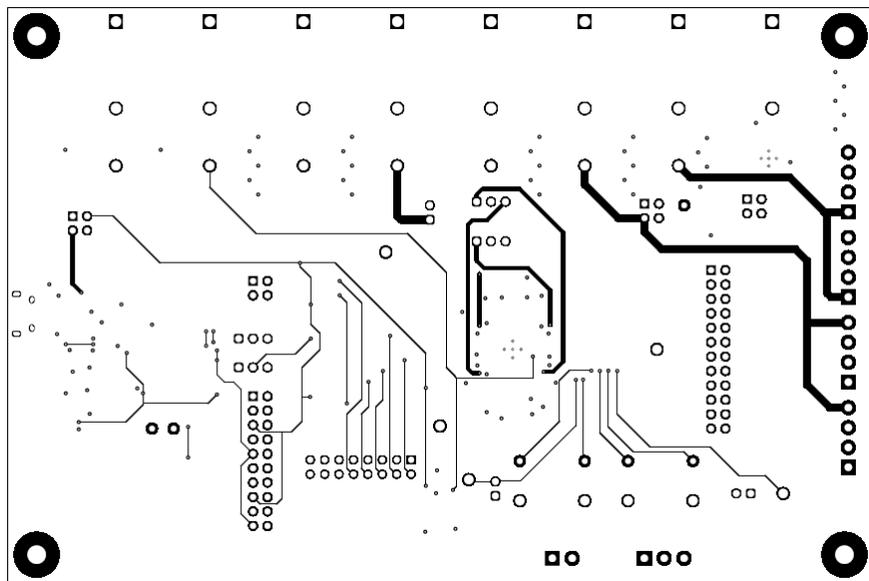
AFE20408EVM PCB Bottom Layer Layout
